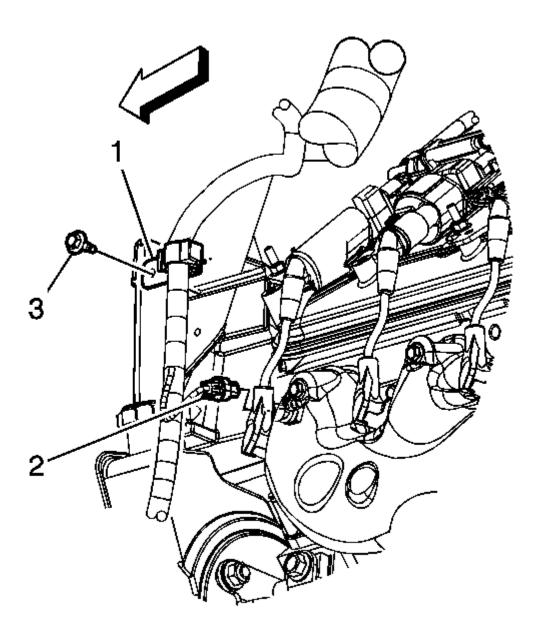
View Of Engine Wiring Harness, Clip, Bolt & Connector Courtesy of GENERAL MOTORS CORP.
